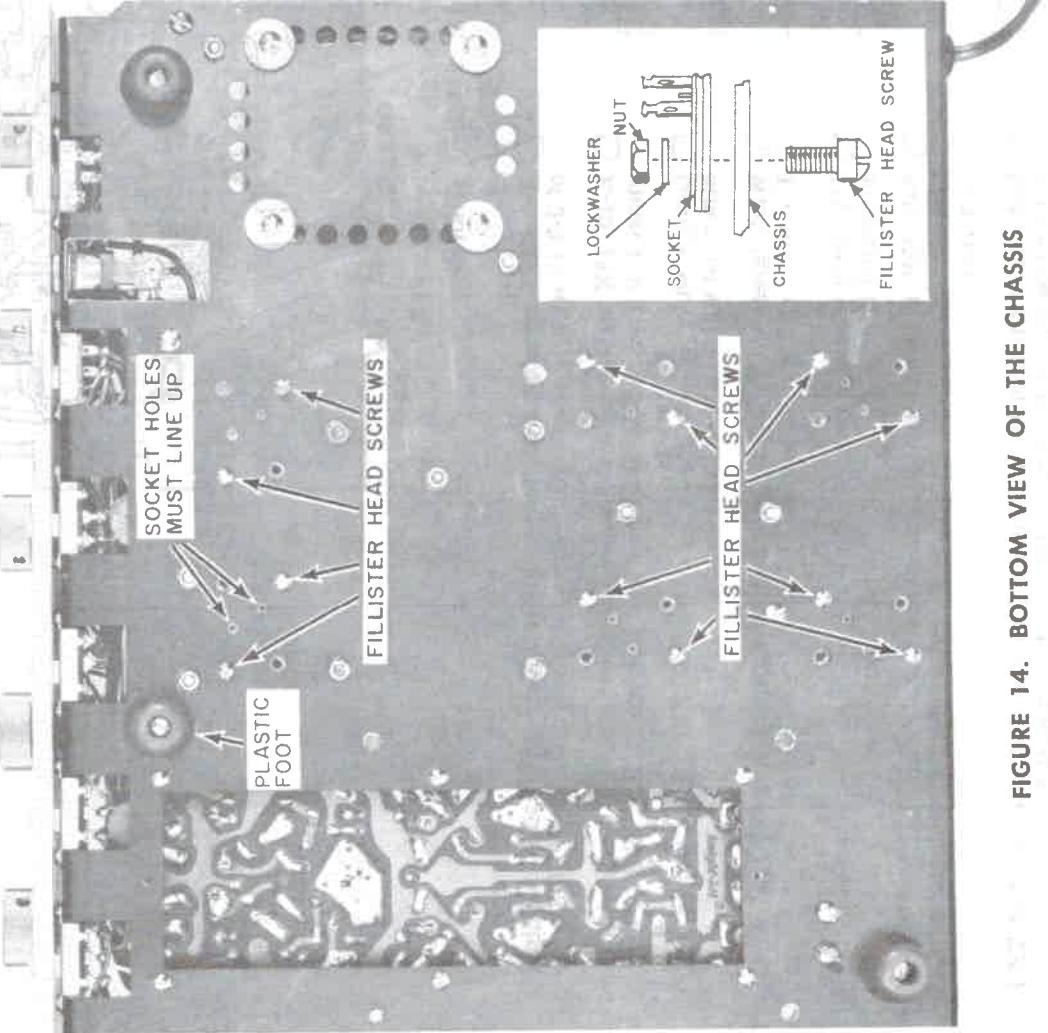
BOTTOM VIEW OF THE CHASSIS
